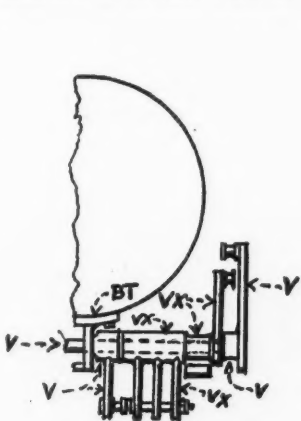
M. W. Baldwin's Arrangement of Main Rocker Shaft Used as Box for Cut-Off Rocker Shaft; 1850.
